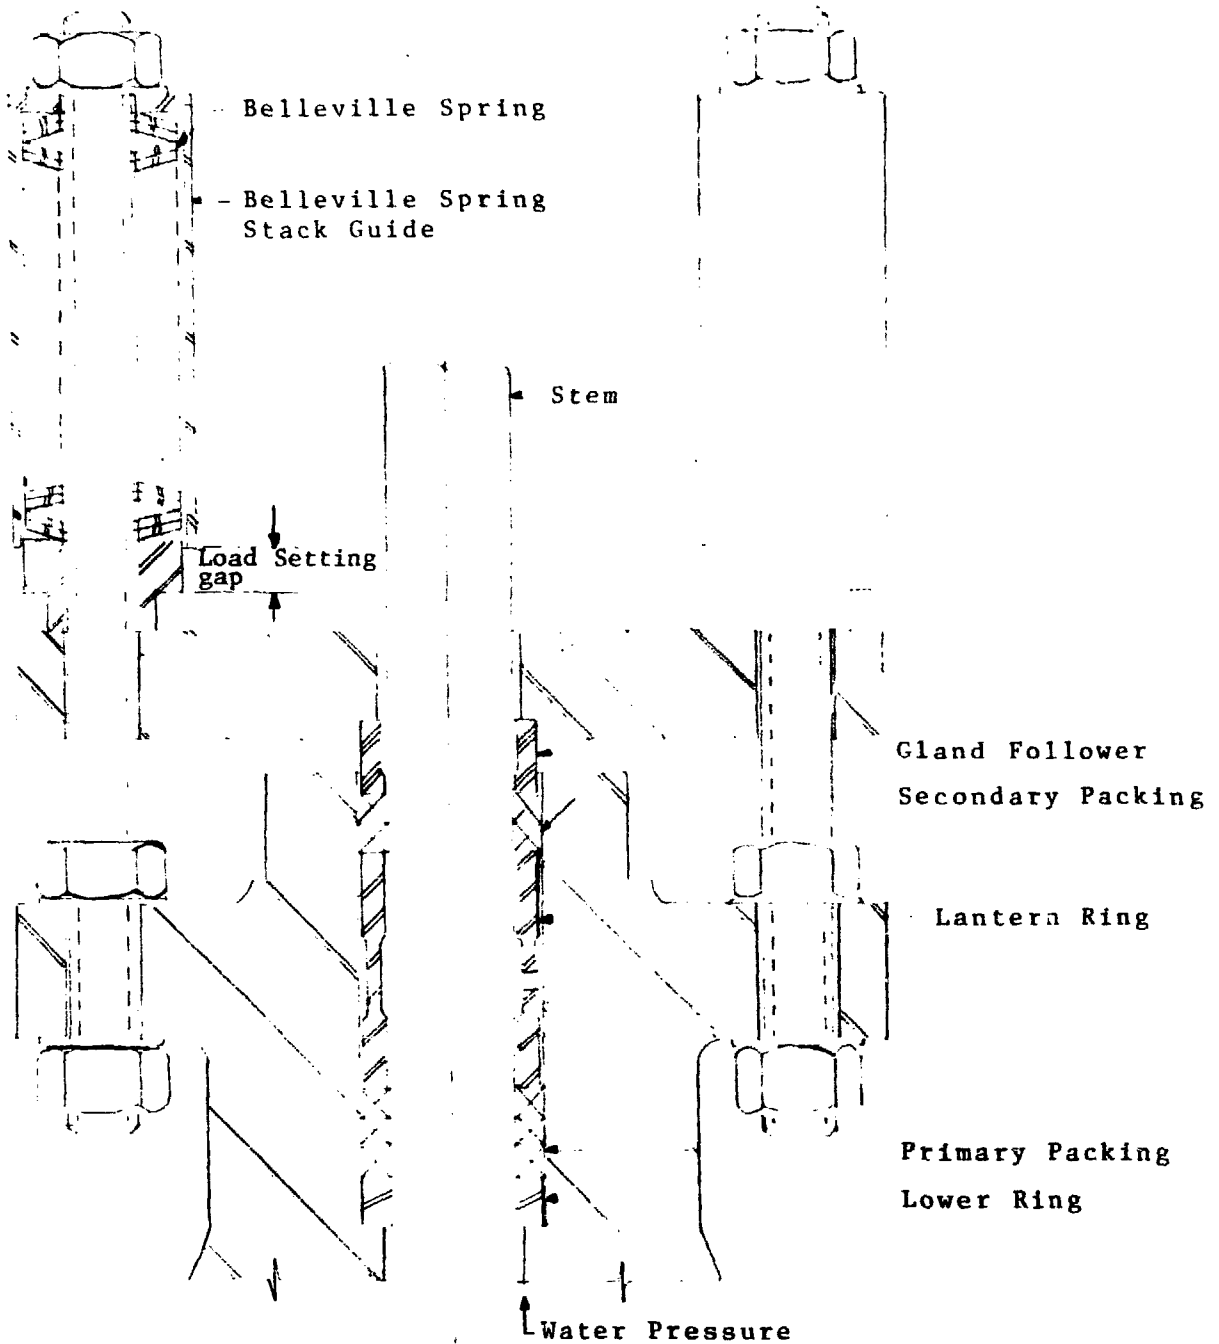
LIVE LOADED DOUBLE PACKED VALVE STEM SEAL
